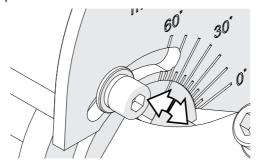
Setting the bevel angle (45° is set on the drawing)
